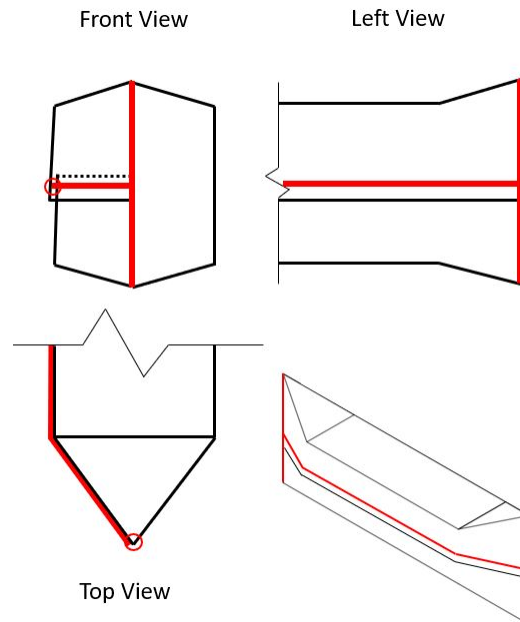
A visualisation of the construction of a single cavity bag using a single sheet of LDPE, heat welded together
